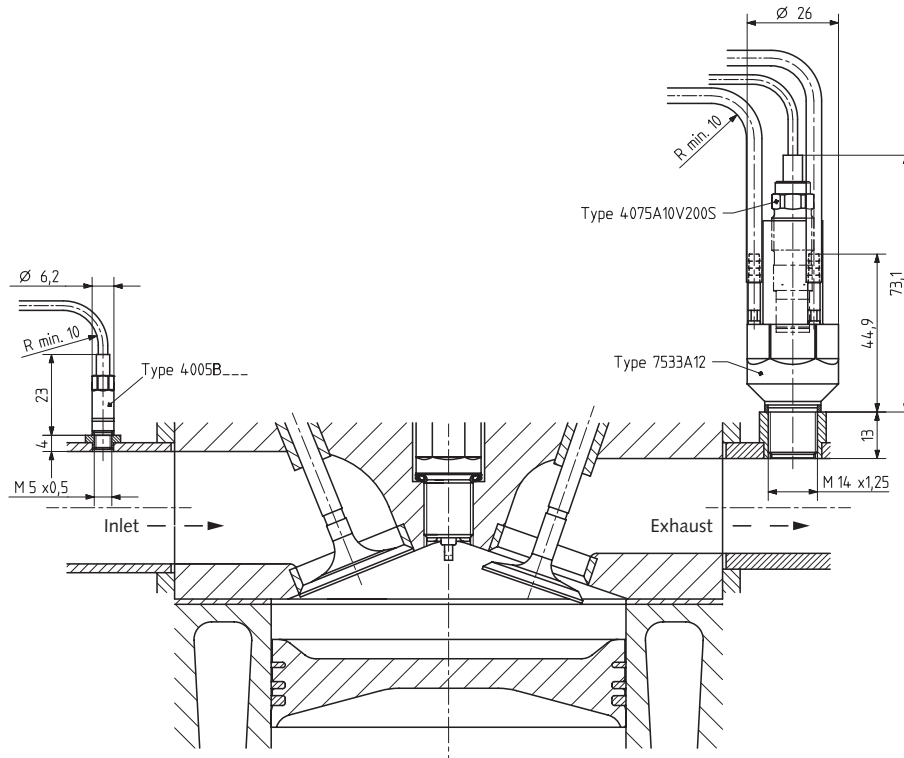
Mounting the sensor Type 4075A10V200S in the cooled switching adapter Type 7533A12 in the exhaust
